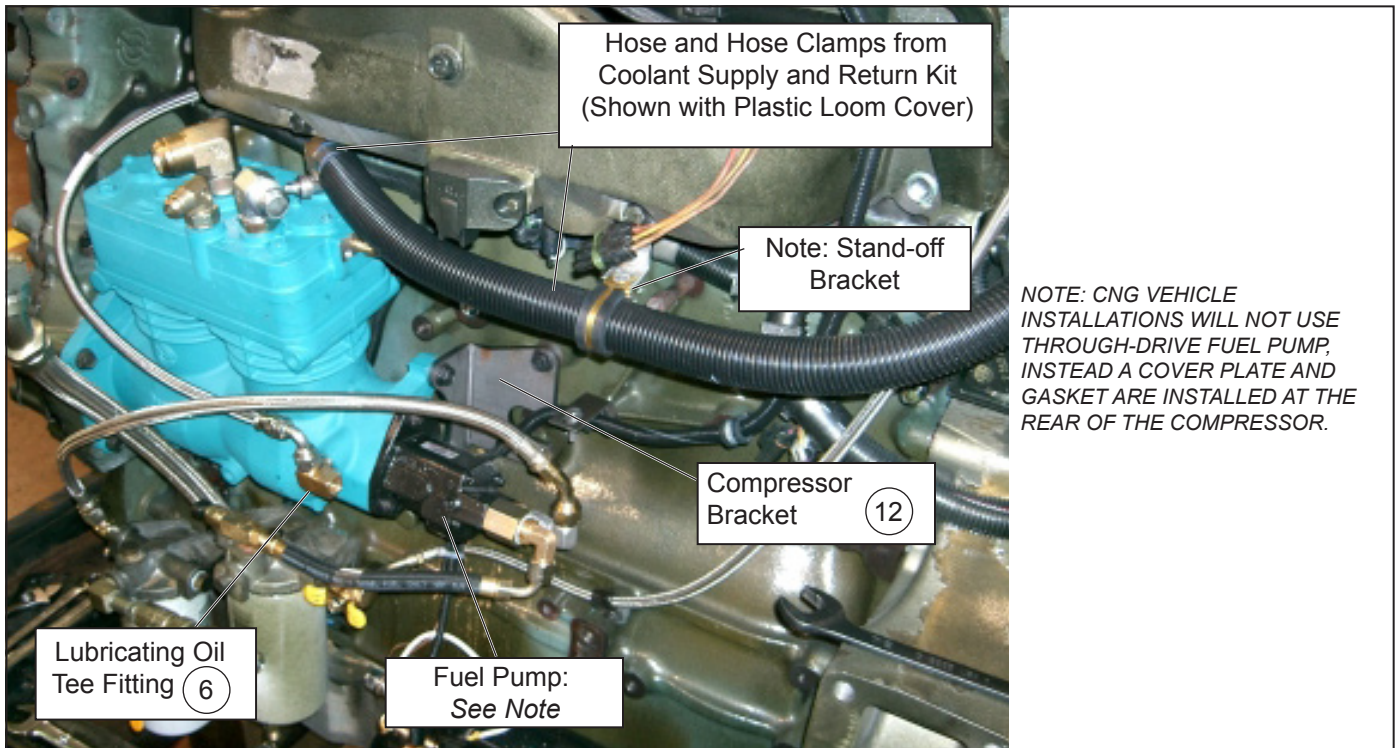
Shows Mounting Bracket, Coolant Supply Routing, and Fuel Pump
